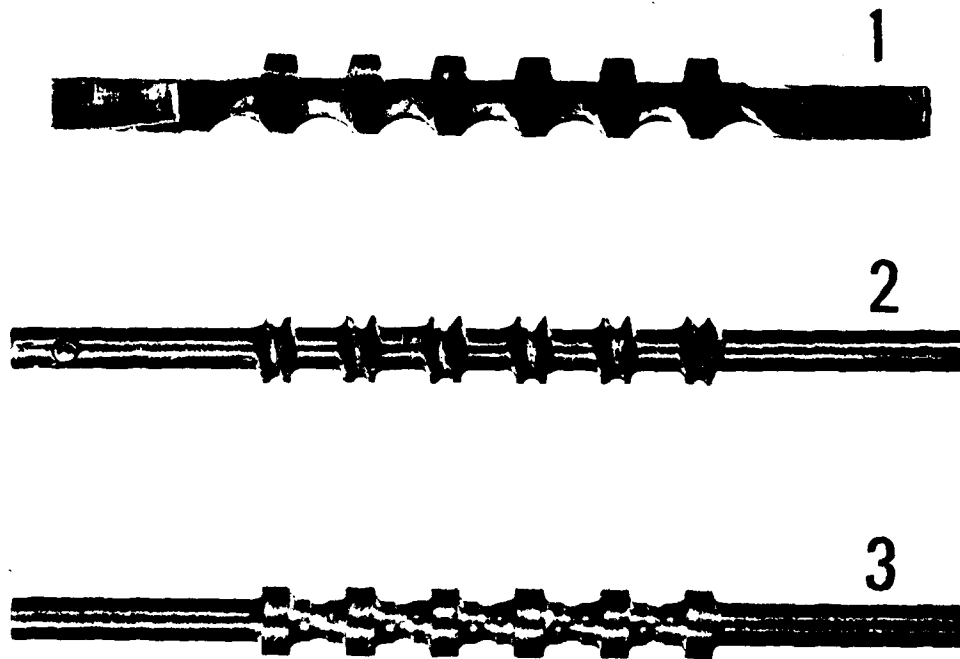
View of the Three Types of Nozzle Ring Spacers Investigated for Improving the Ring Nozzle System
